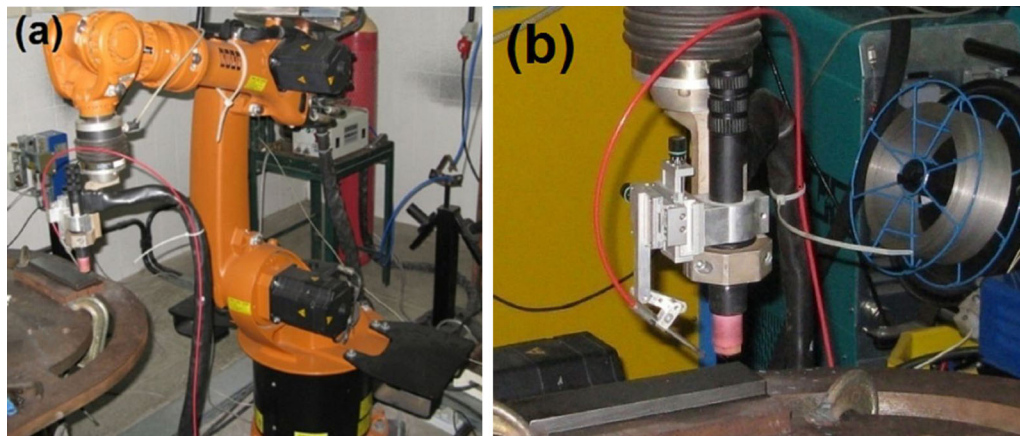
Experimental setup used in the welding process: (a) robotic system, (b) GTAW guide wire feed and torch.
